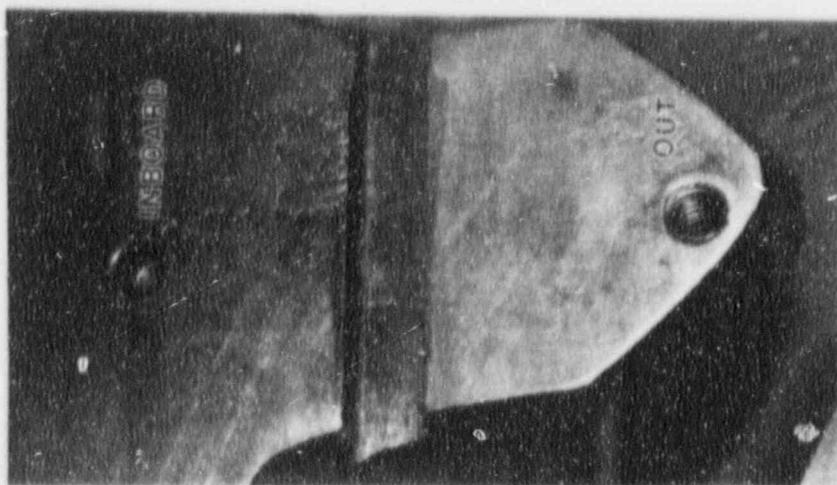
View of engine block top left deck at the location of camshaft bearing block number 1. Note, approximately 5 threads of the inboard bolt hole are stripped while the threads of the outboard bolt hole are basically intact. The condition of these bolt holes supports the accepted failure scenario, where the initiating event is the bearing cap coming loose as a result of the bolts losing preload. Both the inboard bolt and outboard bolt were found to be short.
